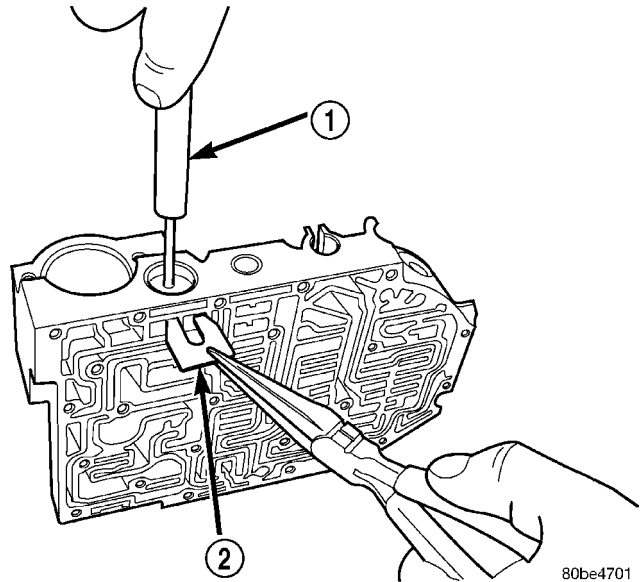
Remove Regulator Valve Spring Retainer using Tool 6302
